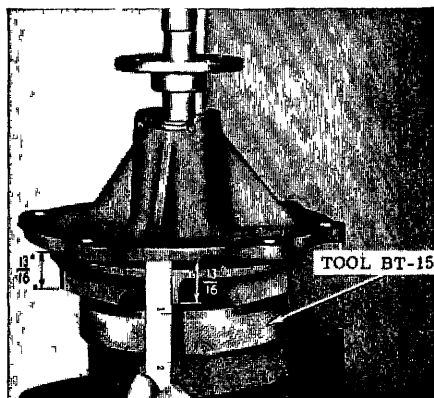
Installing impeller on 1949-52 Rocket water pump
